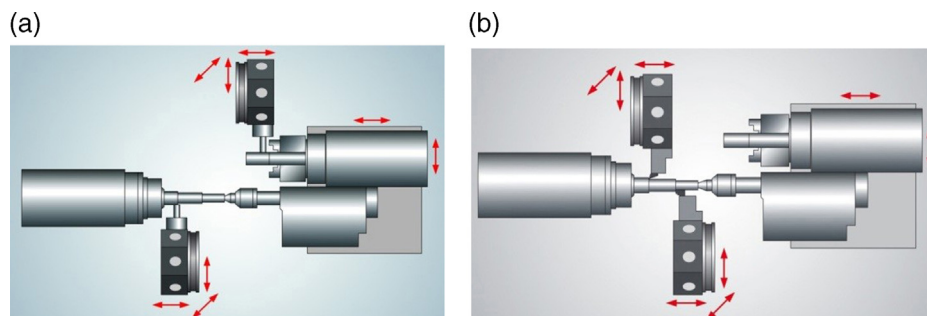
An example of a machine tool with two spindles and two turrets [10].
